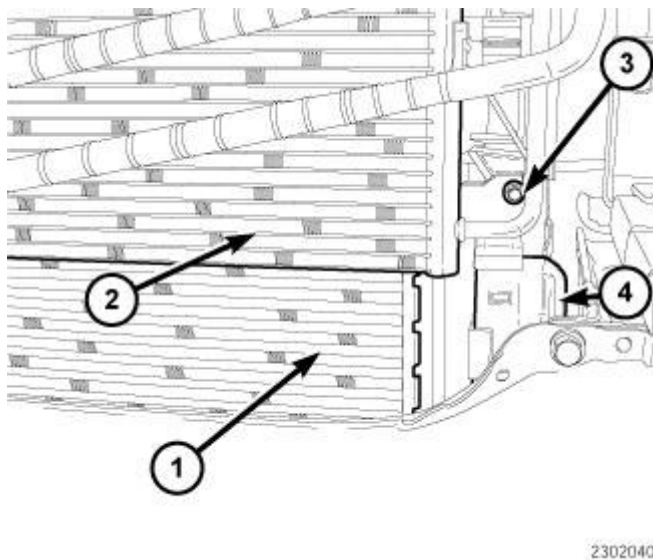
CHARGE AIR COOLER & RADIATOR BOLT
